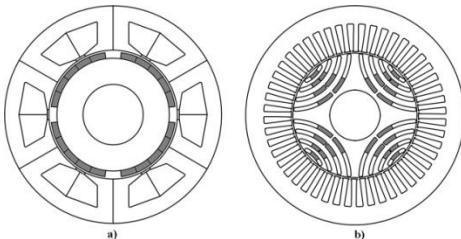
Final designs: a) CW-SPM motor; b) PMASyR motor.
